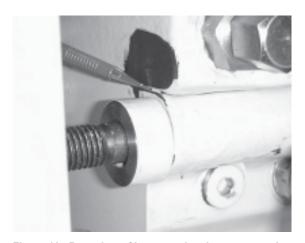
Rear view of hammer showing upper socket head cap screw as taken from side opposite control panel. Pencil shows junction between upper and middle hammer housings. Spacer must not contact upper housing (above pencil).
